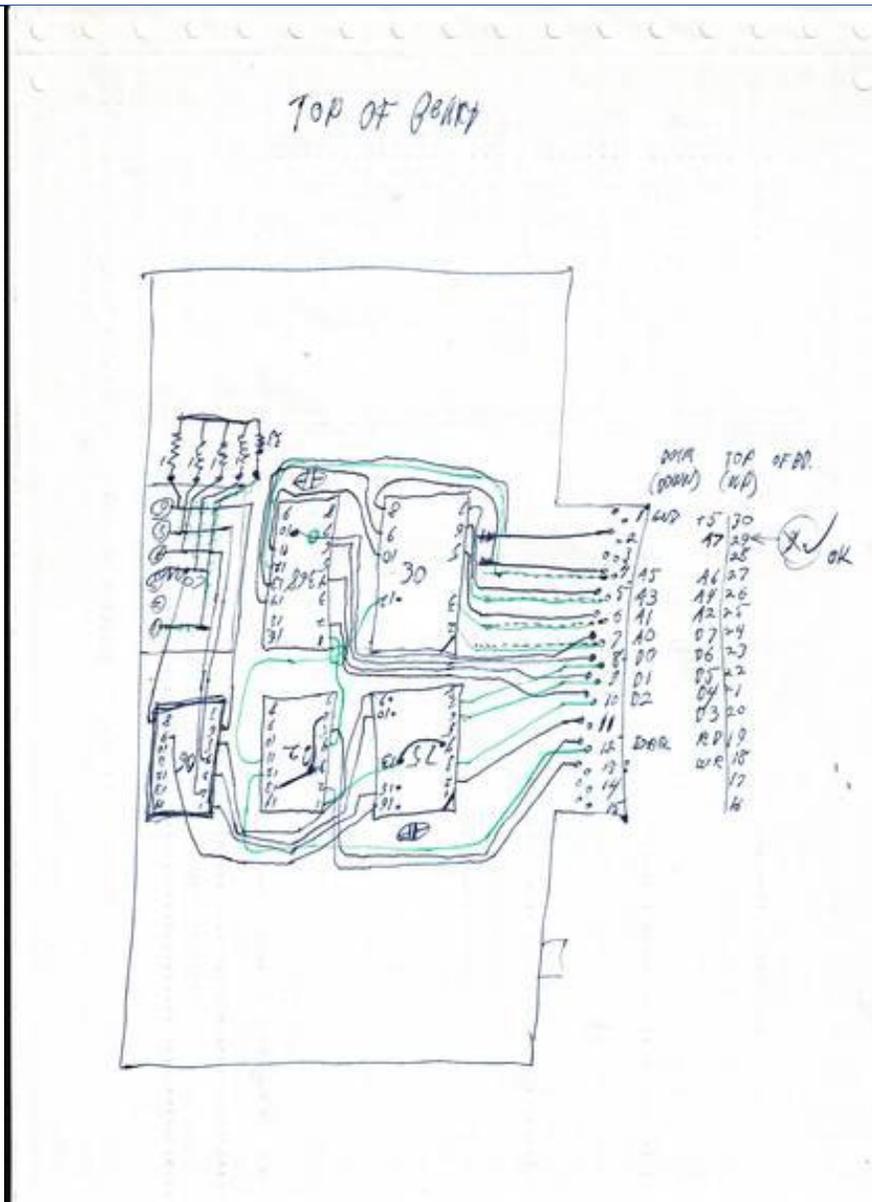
Component-Side Wiring Sketch with Expansion Slot Pinout
